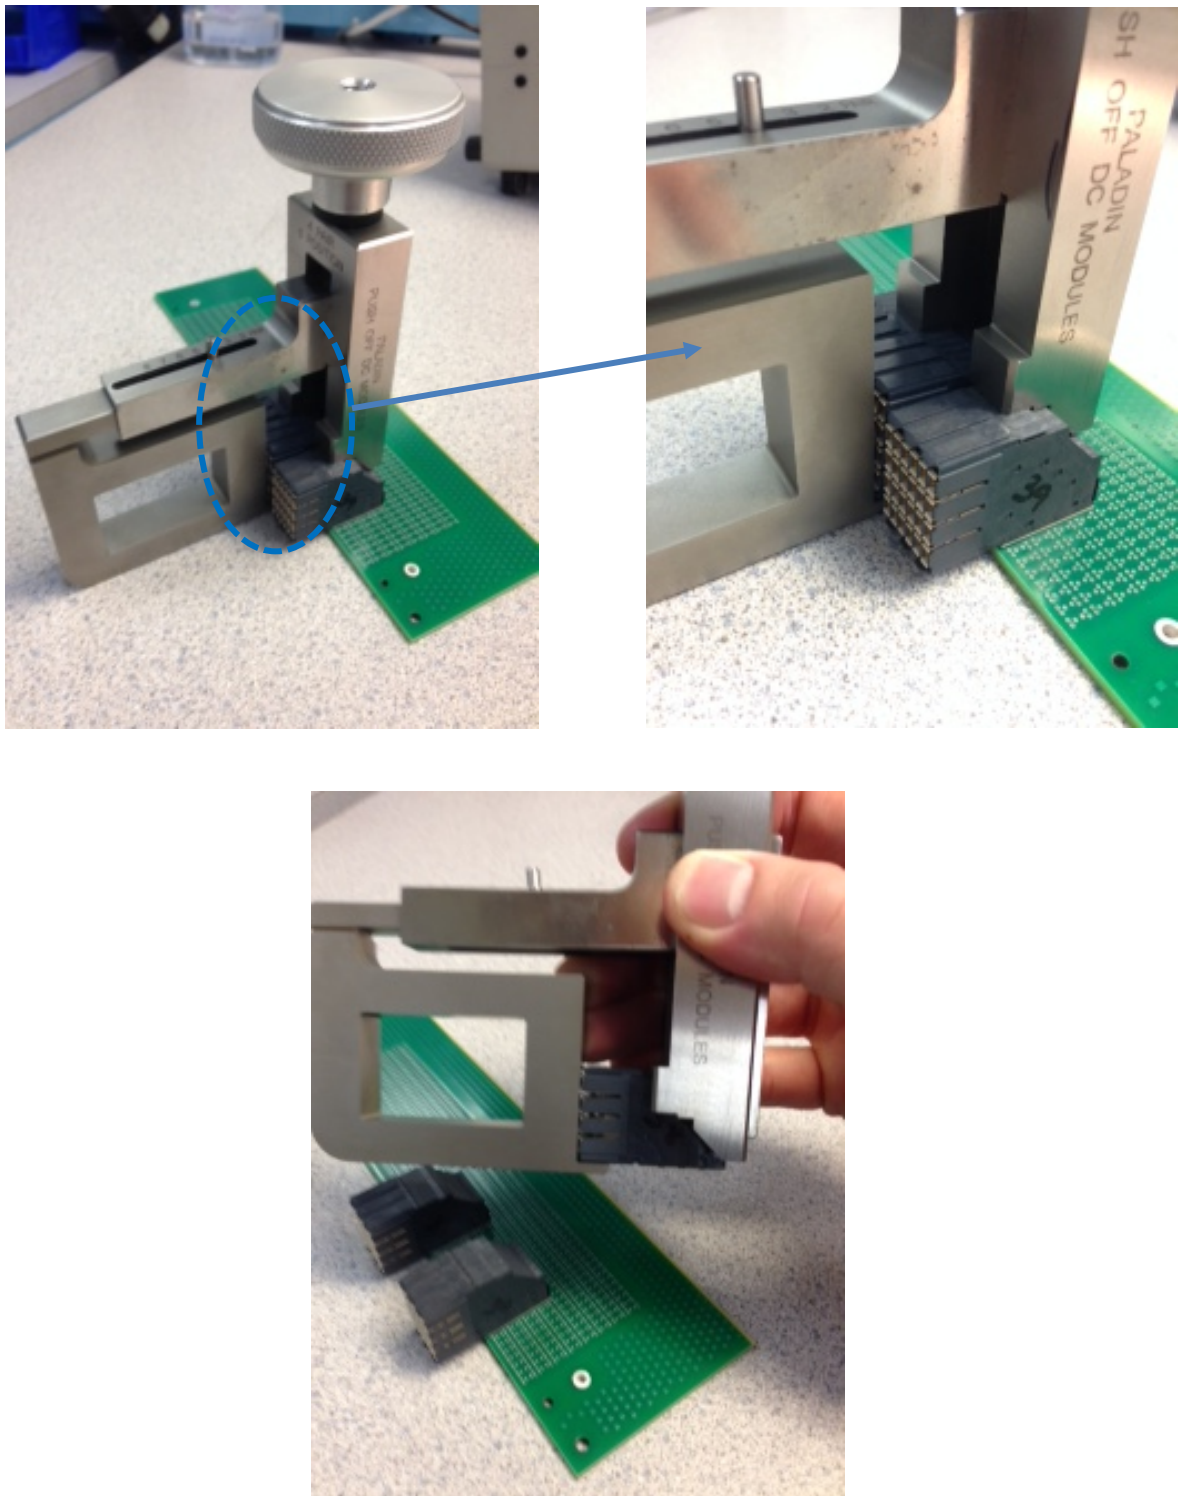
Paladin RAF Module Removal Tool with Push Body Attachment.
